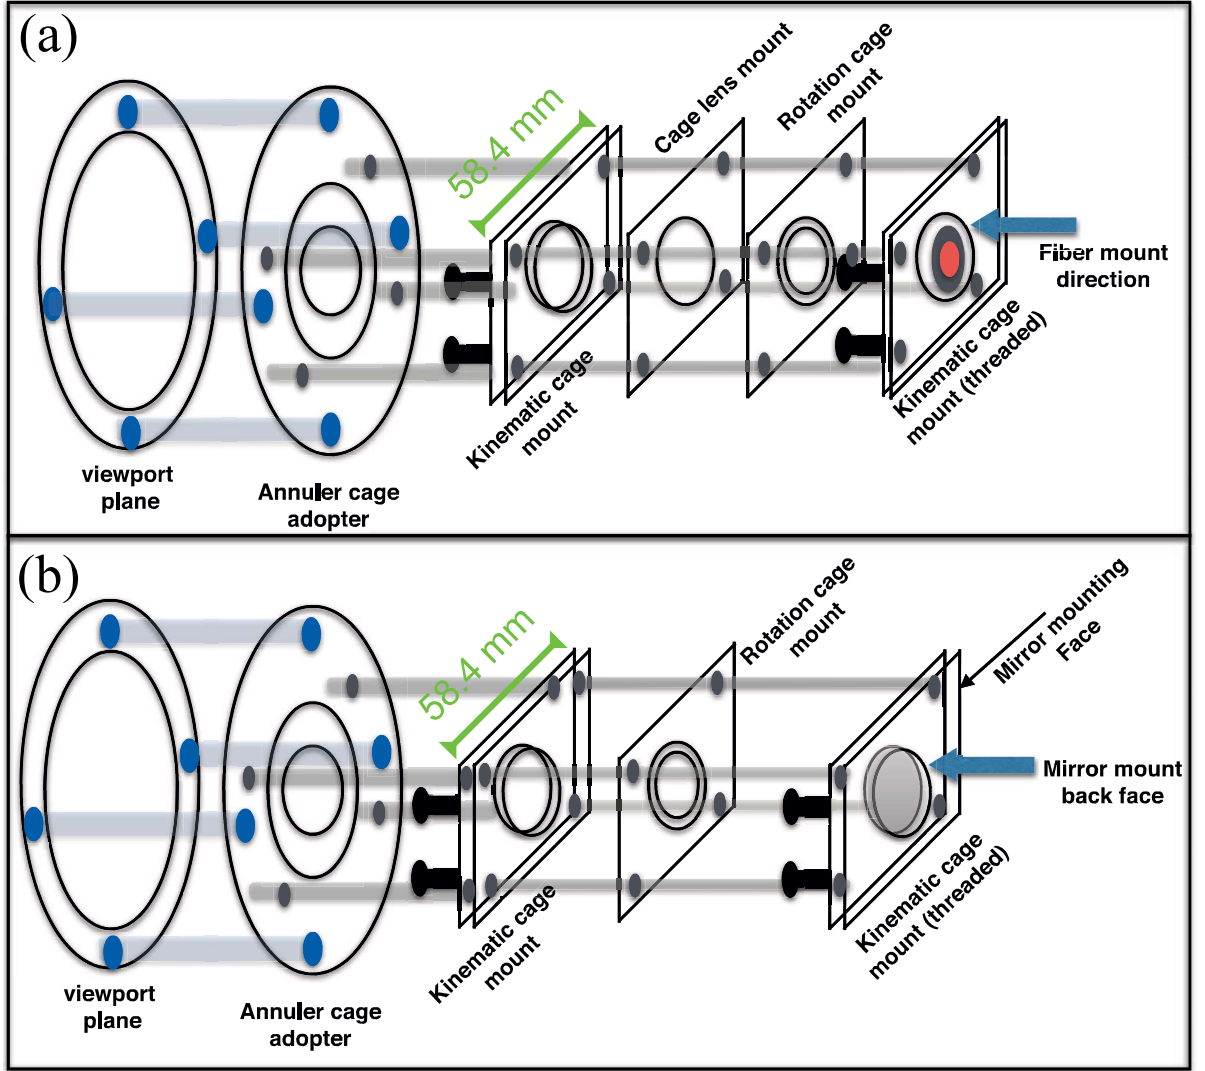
Opto-mechanical cage assembly. (a) Assembly for input MOT beam to the chamber. (b) Assembly for retro-reflected MOT beam.
